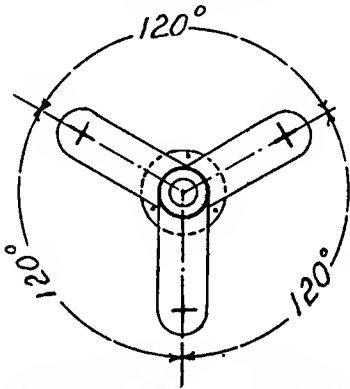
Diagram showing relative positions of the crank pins of a six-cylinder motor flywheel flange in rear. Shaft viewed from the front end.
